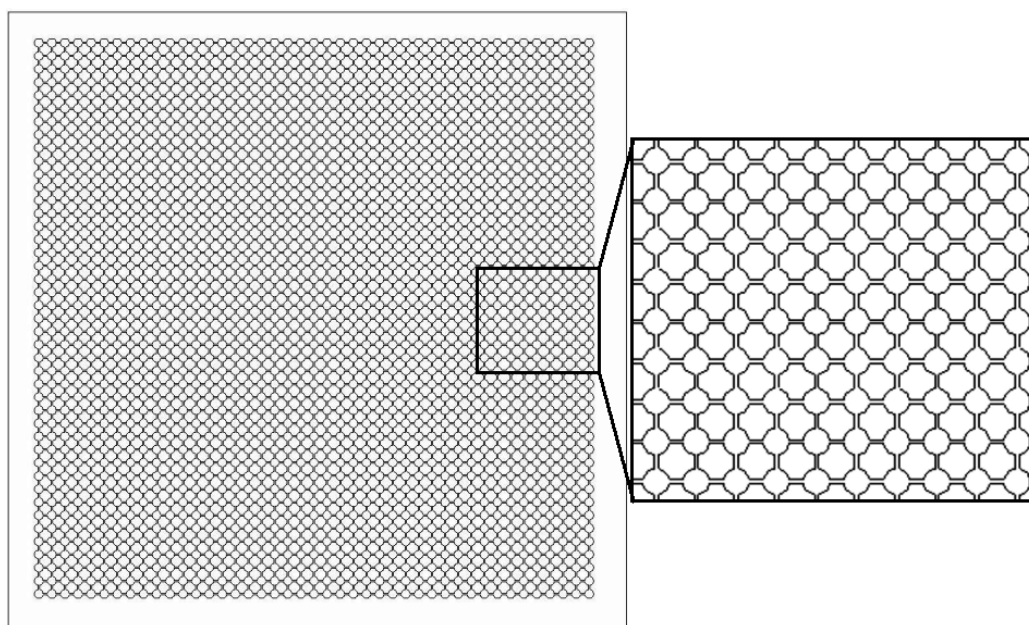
Schematic of a perforated sheet (1 mm diameter holes and 0.05 mm thick) with 0.15 mm width channels etched in one side of the sheet. The channels were 0.025 mm deep.
